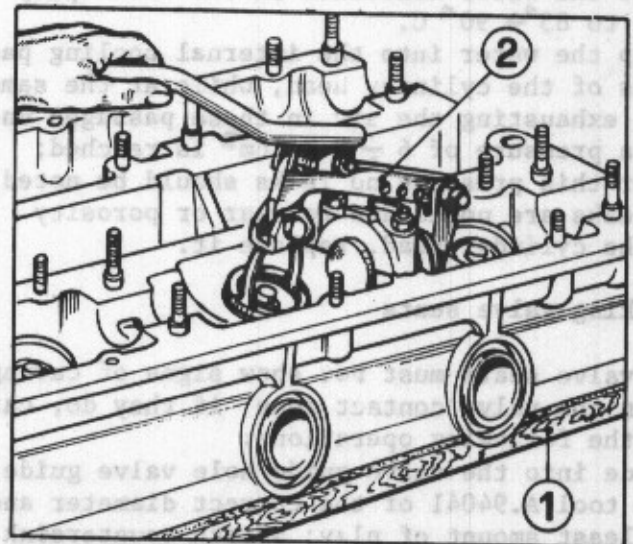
Cylinder heads valve removal with tool AV508(DINO).
